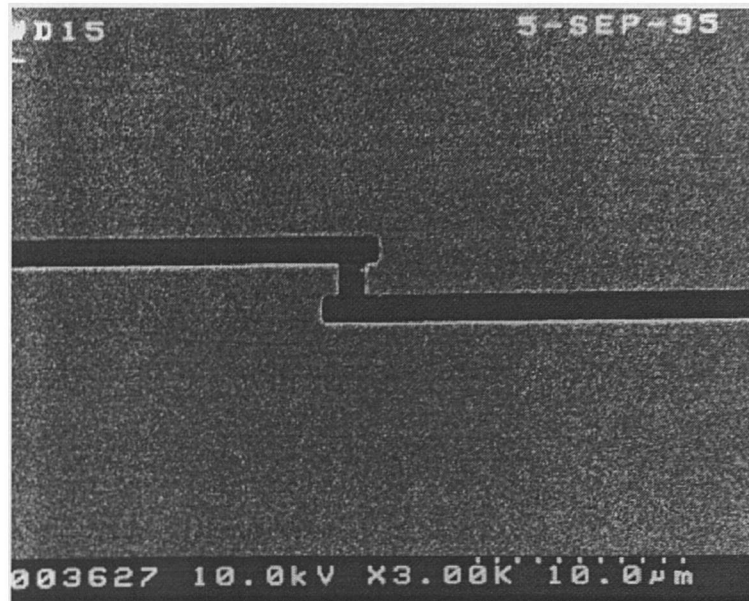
Two milled cuts joined by a smaller perpendicular cut to ensure that misalignment is eradicated.
